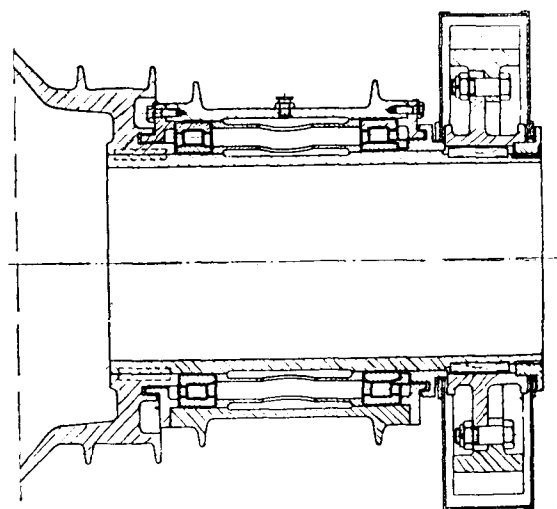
Roller Bearings fitted on hollow axle of electric rail car.
